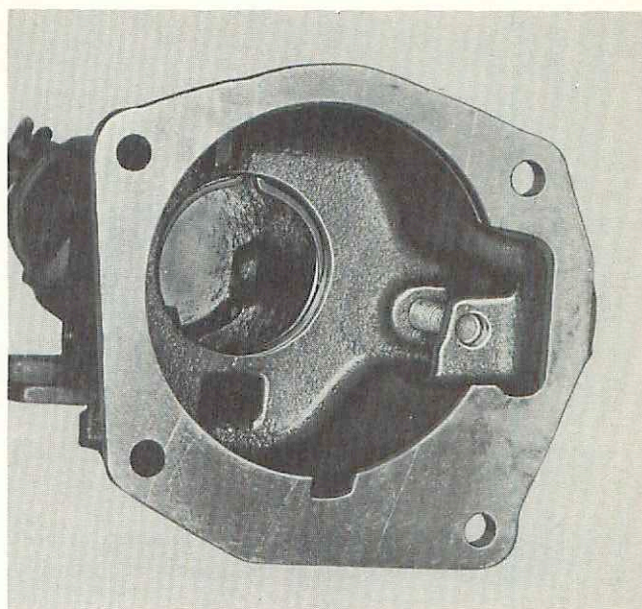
Use a Rubber Band to Hold the Rollers in Position
